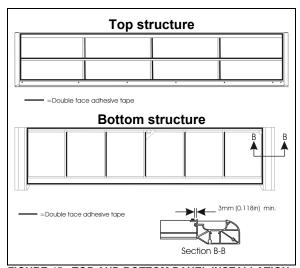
TOP AND BOTTOM PANEL INSTALLATION - DOUBLE FACE ADHESIVE TAPE APPLICATION
